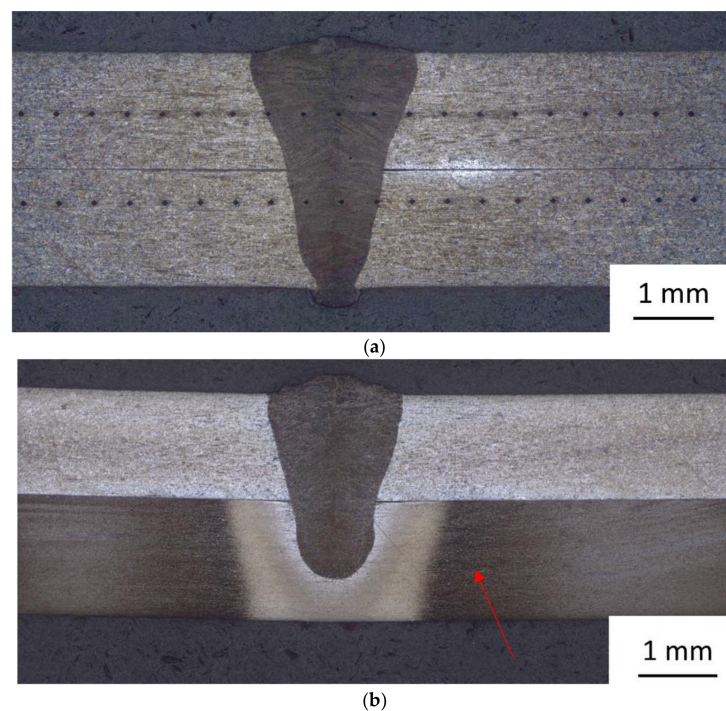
Macrostructure of welds with different combinations of sheets and laser power: (a) T15-82a + T15-82a welded with 1920 W; and, (b) T15-82a + T15-82c welded with 1650 W with heat affected zone marked with arrow.
